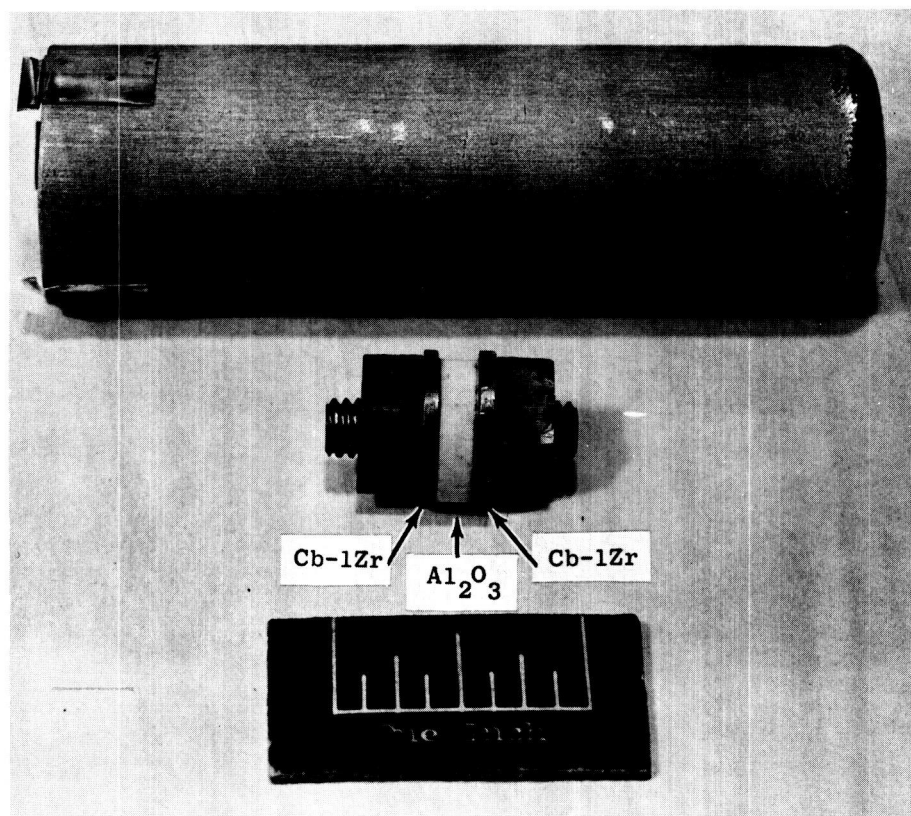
Test Assembly #5 with Cb-1Zr Alloy Capsule Prior to Filling with Potassium and Sealing Under Vacuum. (C63112940)
